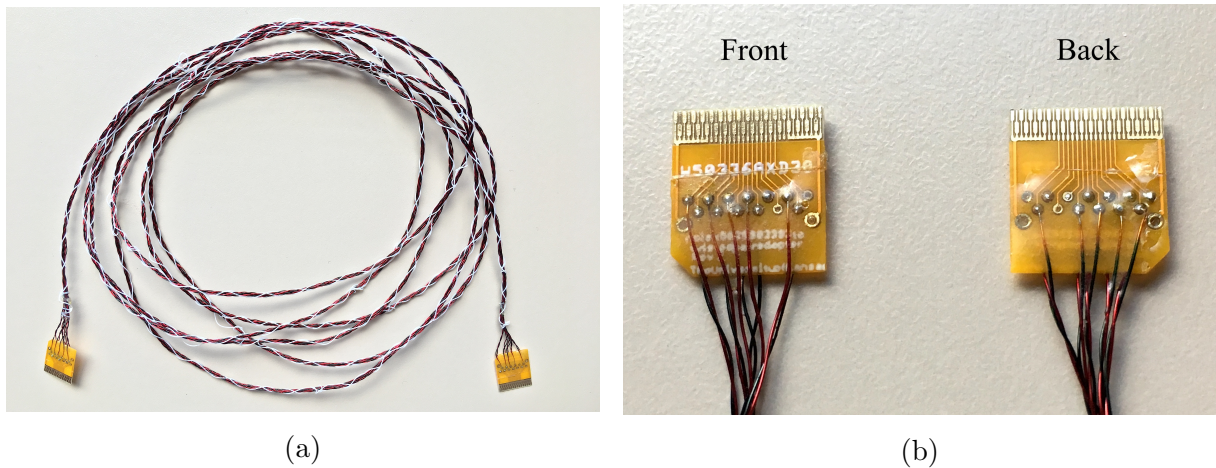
Photograph of a 2m-long twisted pair cable prototype (a) and zoom to the paddle boards (b).
